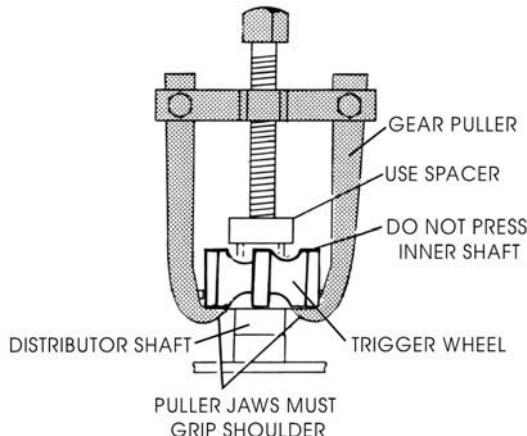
A special gear puller like the one shown here is used to remove the trigger wheel from the distributor shaft.
